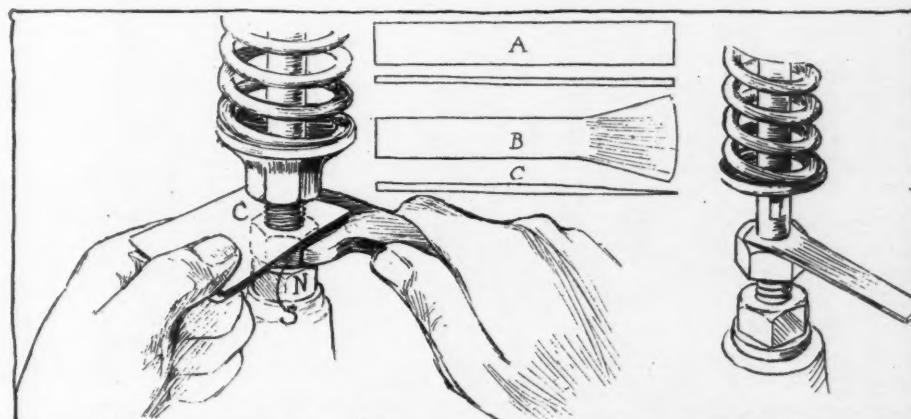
METHOD OF LOCATING AND ADJUSTING NOISY VALVES
